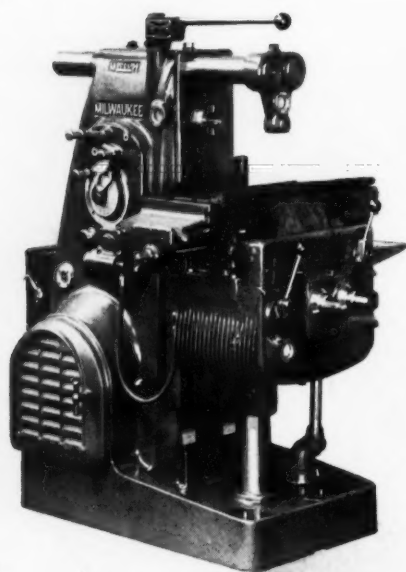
Kearney & Trecker Model H Milling Machine Built in Various Sizes for Light Duty
